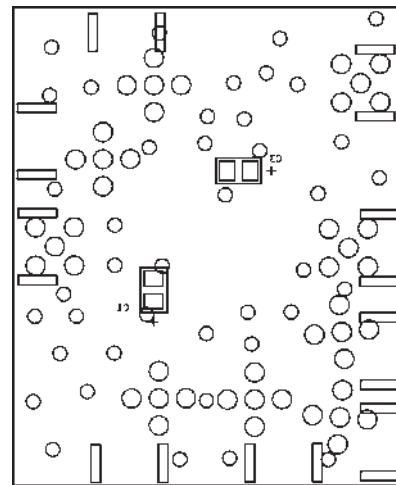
EVAL-AD8174EB Solder Side Silkscreen
